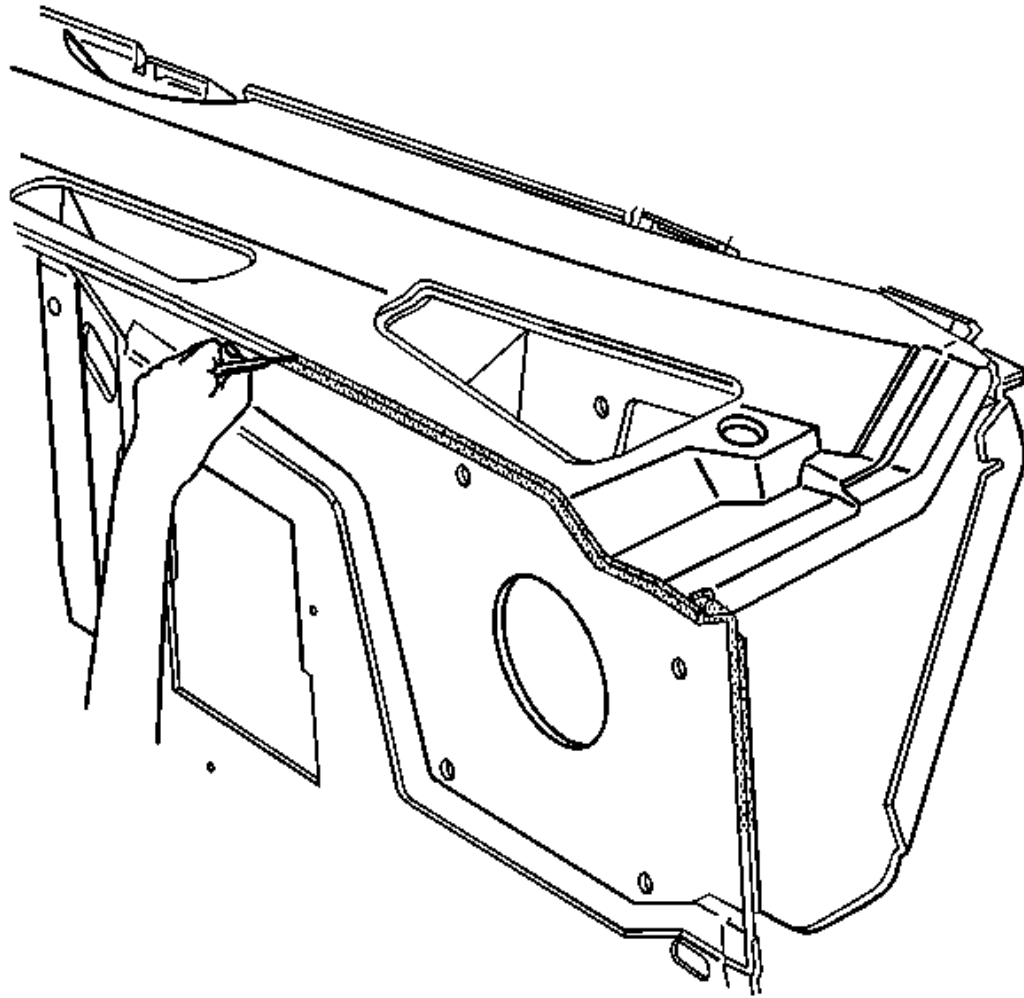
Cutting Out Adhesive Caulking (2 Of 2)
